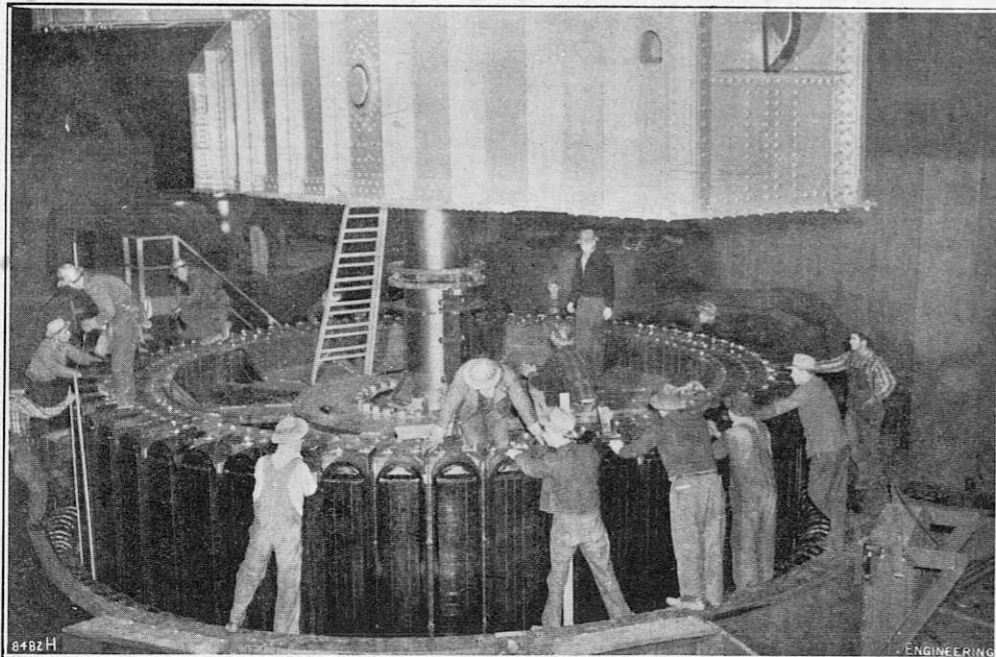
GENERATOR ROTOR BEING LOWERED INTO POSITION.
